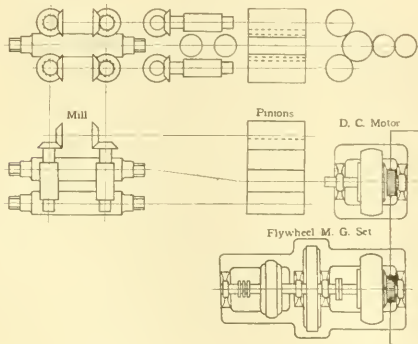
TYPICAL DRIVE FOR A TWO HIGH REVERSING UNIVERSAL PLATE MILL
